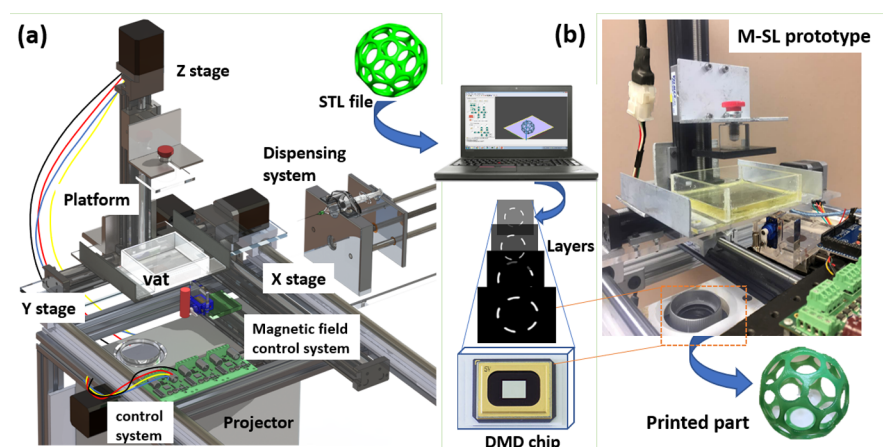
(a) M-SL machine design; (b) M-SL prototype.
